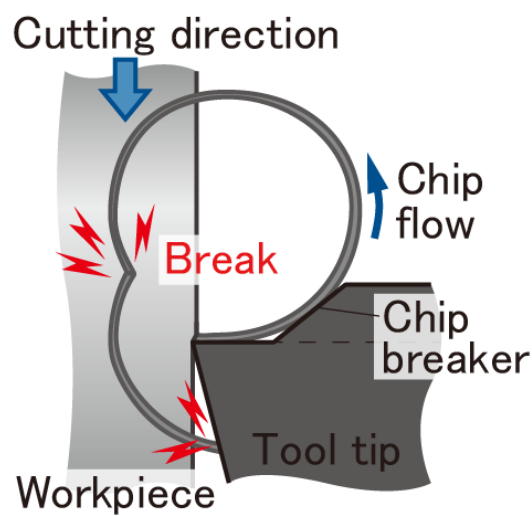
Chip flow on cutting with chip breaker (Obstruction type)
